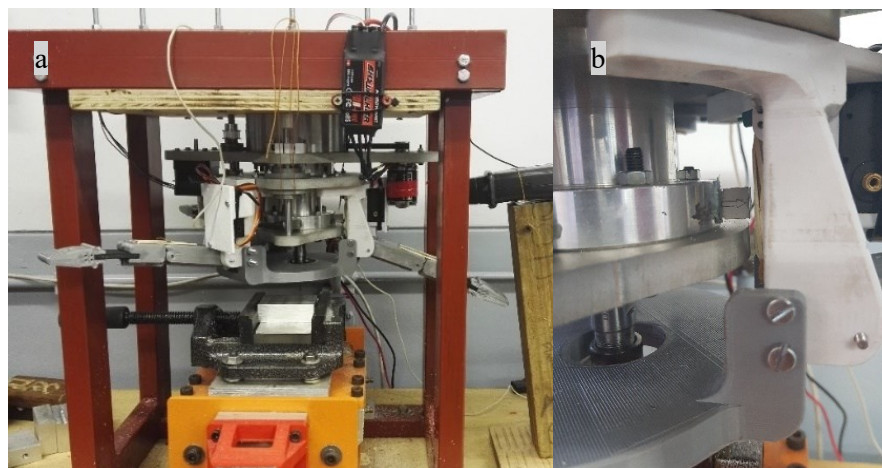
Experimental Setup (a) Aluminium Sample Cut (b) Accelerometer Mounting
